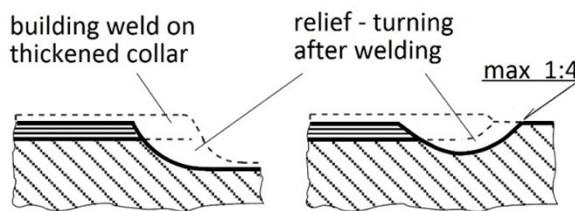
Build-up welds applied to rudderstocks and pintles
